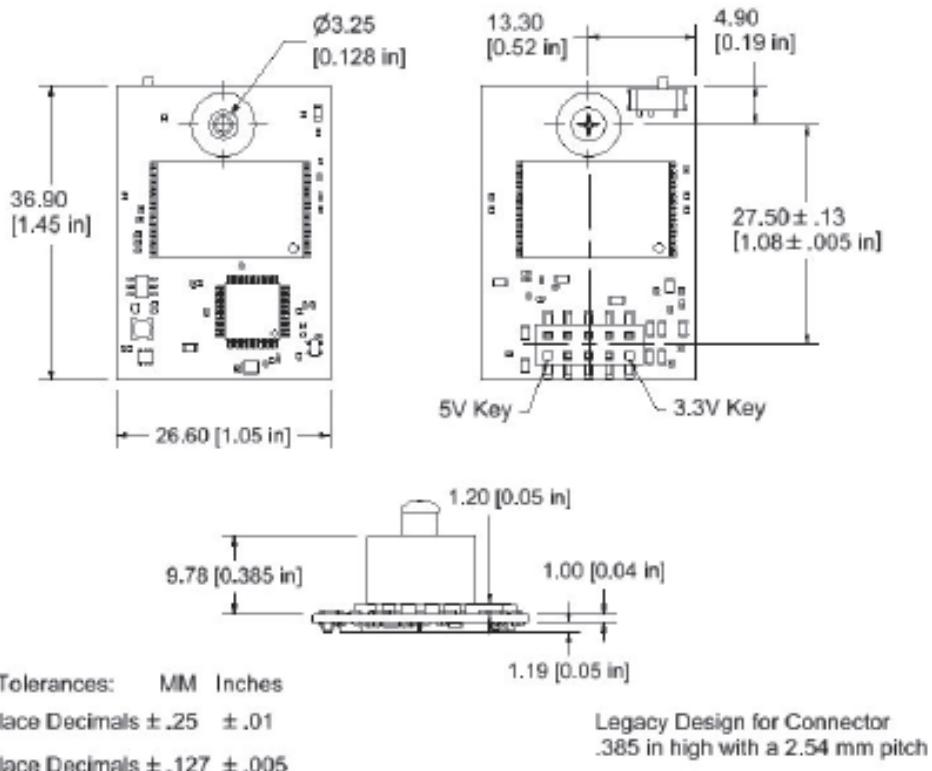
eUSB 3.3V or 5V U Connector Dimensions (in mm [inches])
